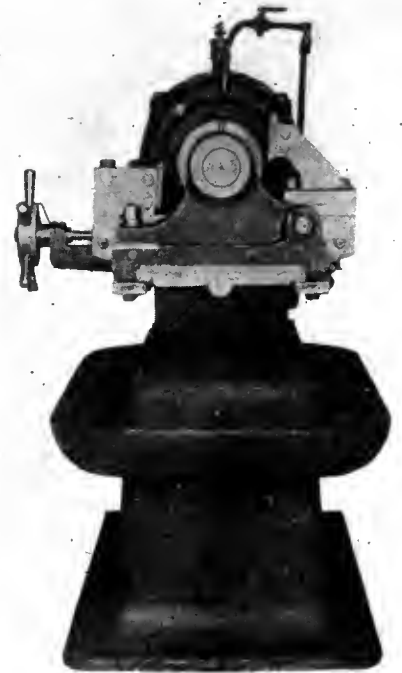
END VIEW OF BAND TURNING MACHINE.
